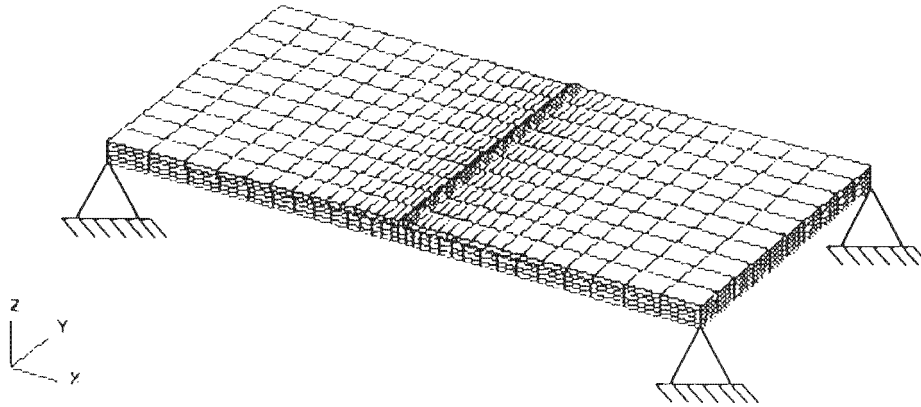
Discretized welded plates with clamping scheme
